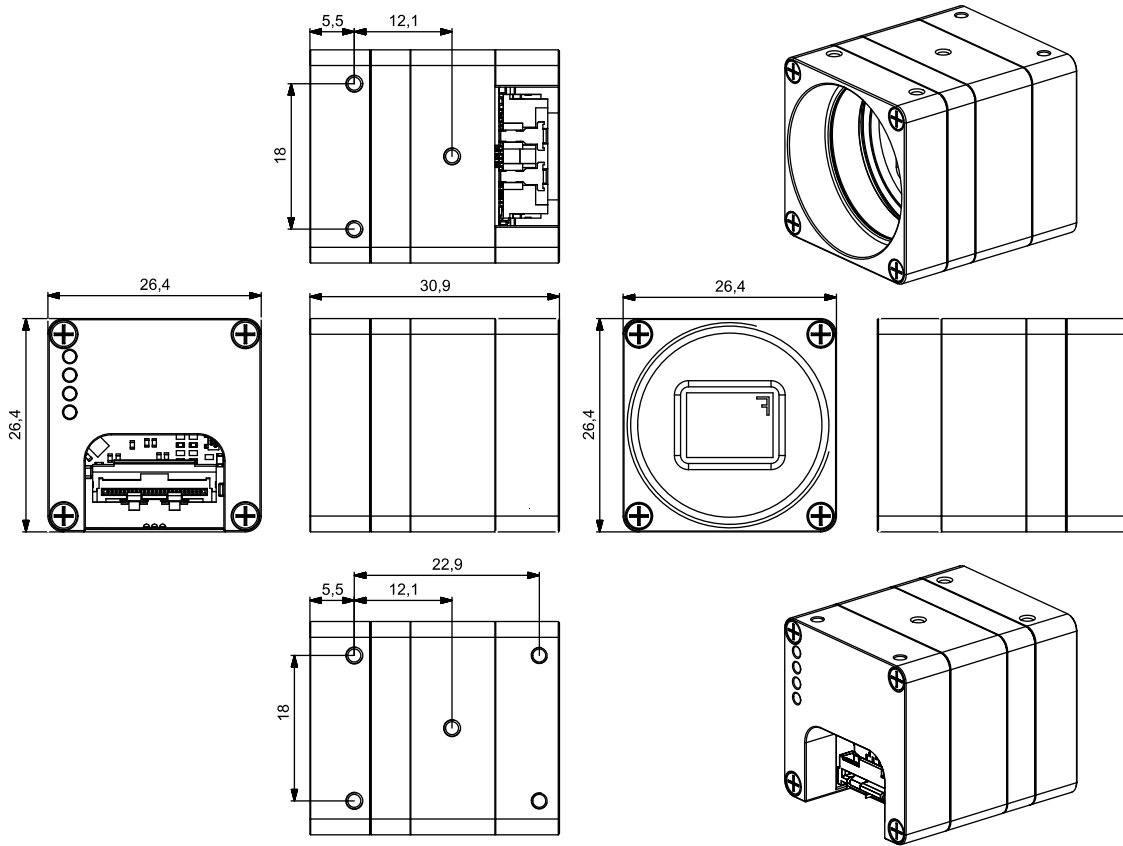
Dimensional drawing of MX023xG-SY-X2G2-FV (C-mount (with C mount module B))
